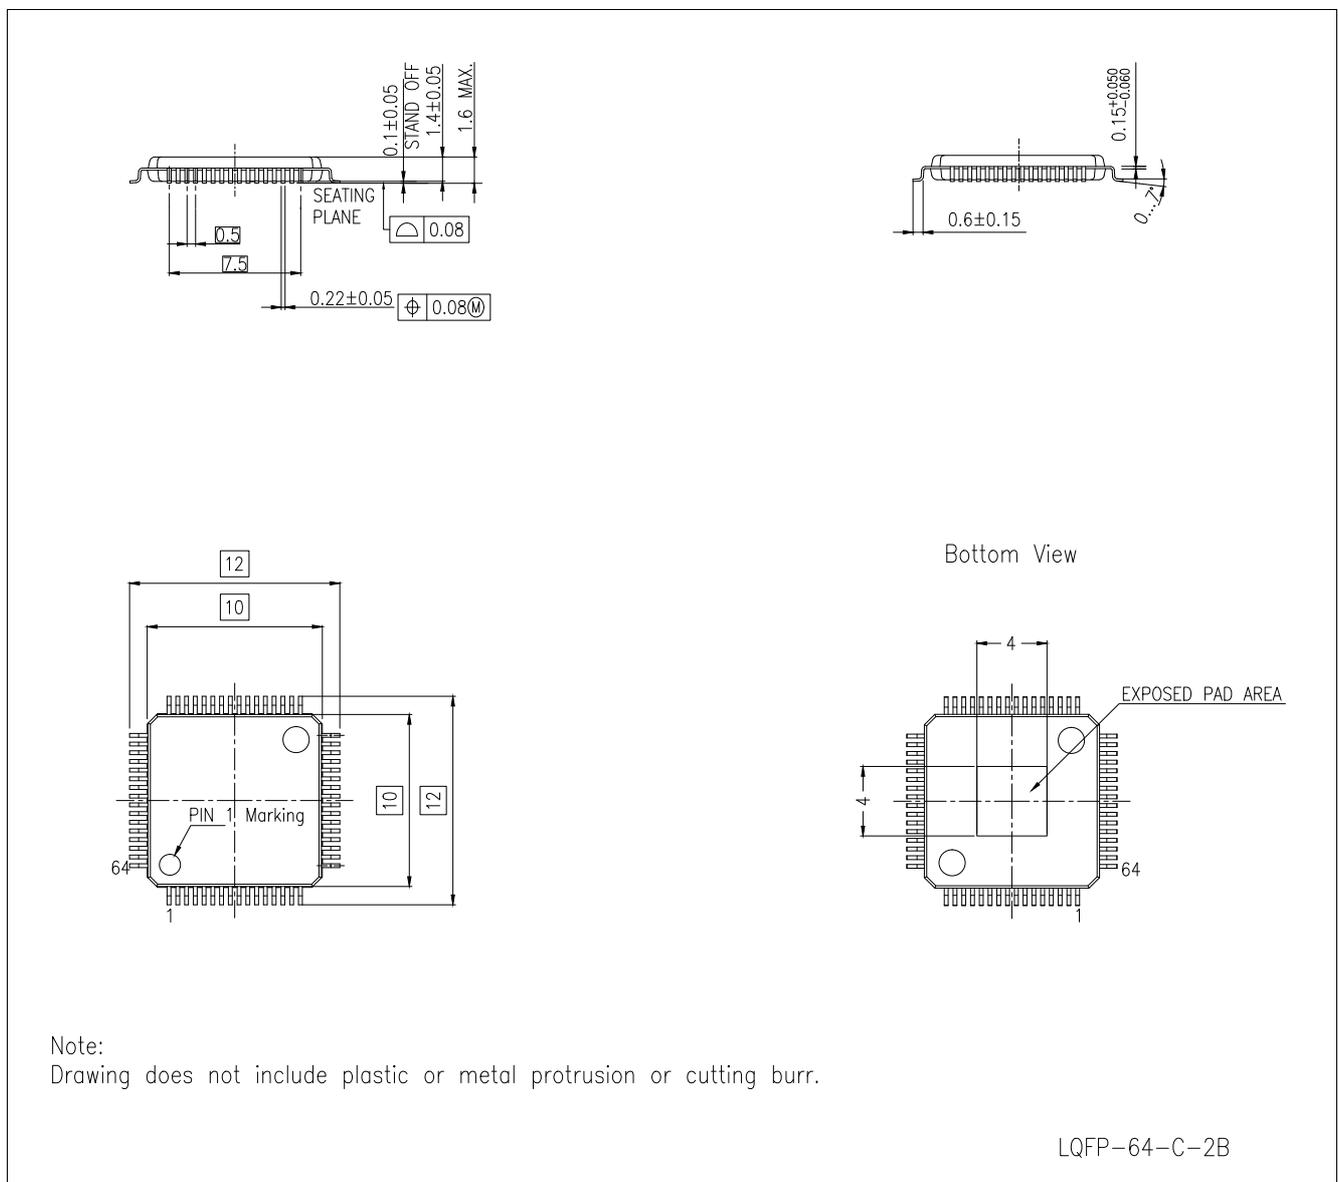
Package Outline Drawing of the PG-LQFP-64 Package
